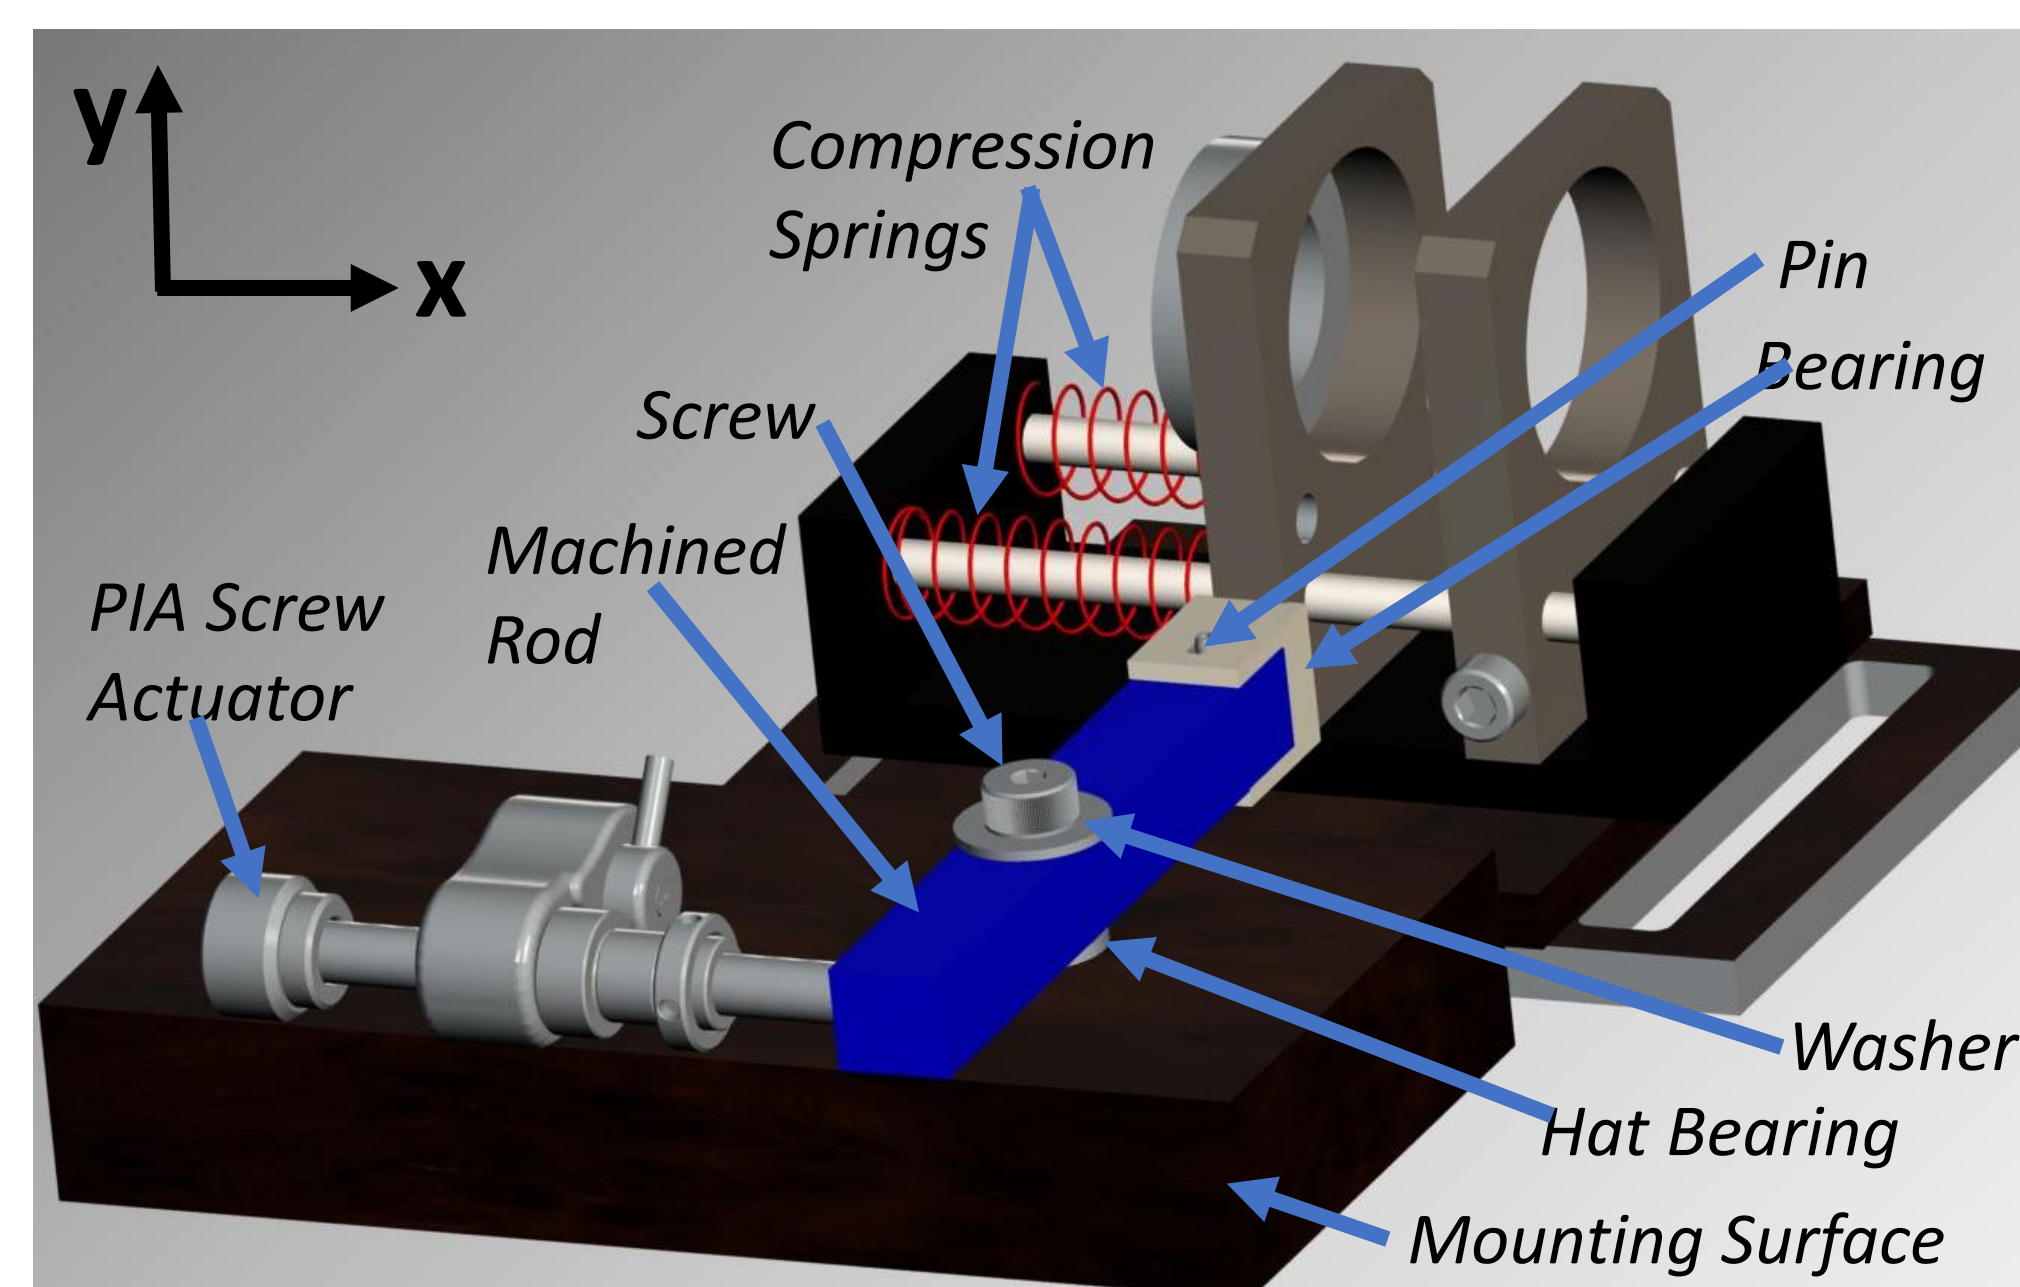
Final design with compression springs to move the lens backward, a bearing attached to the hole where the screw once was, and a rod which gives a 3:2 ratio advantage of the motor to allow it to travel more than 25 millimeters.
